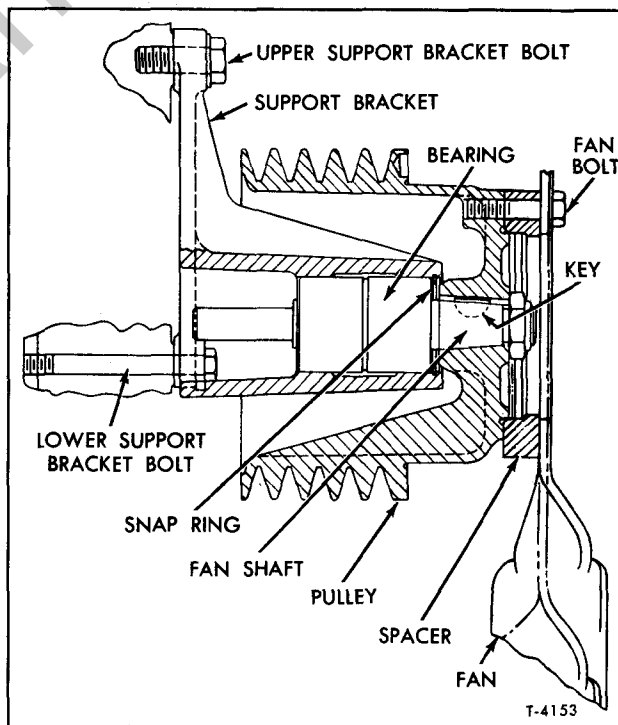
Separately Mounted Fan Support Assembly (6-71 Engine) (Typical)
